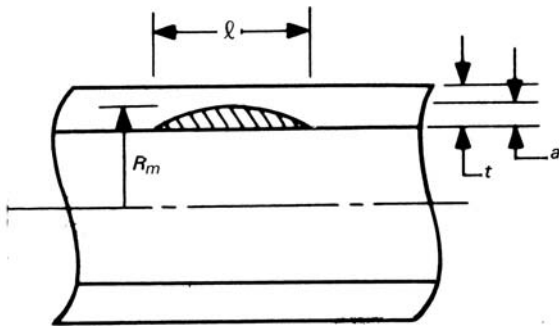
AXIAL FLAW GEOMETRY
